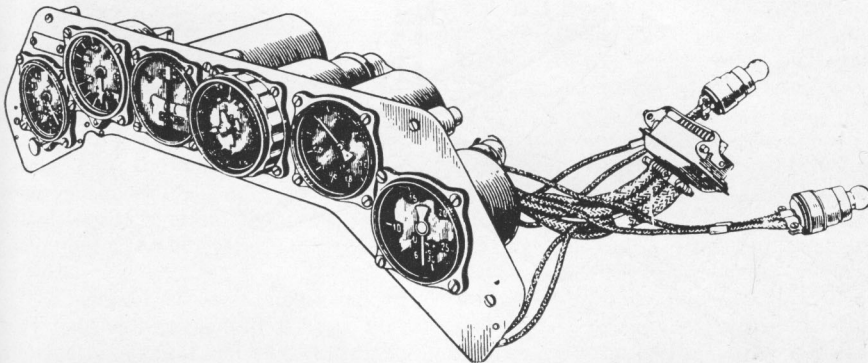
Quickly detachable flight instrument panel with, left to right, altimeter, bank-and-turn and air-speed indicators, tachometer, compass, and manifold-pressure gauge. Note the use of quick-disconnect plugs.
